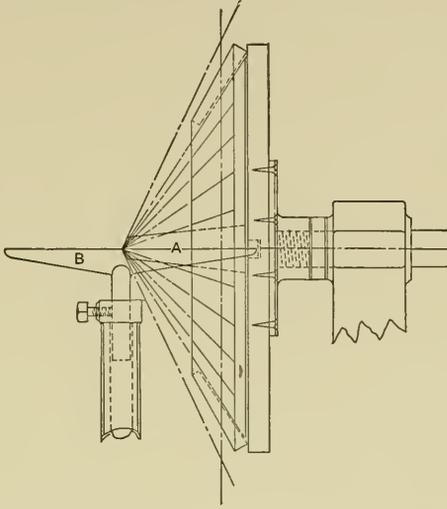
Face Plate with Blocks at Center of Gear to Form Apex of Cone
